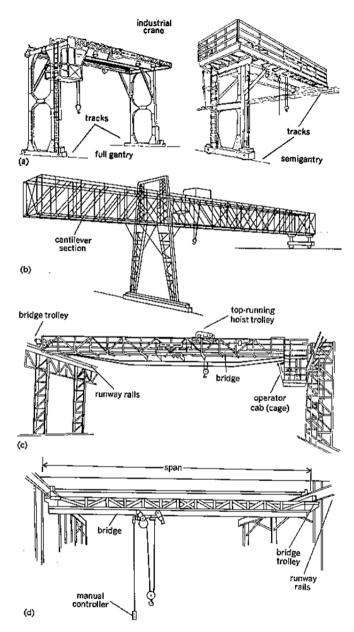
Basic types of overhead-travelling cranes. (a) travelling gantry cranes. (b) Cantilever crane. (c) Top-running crane. (d) underhung crane
